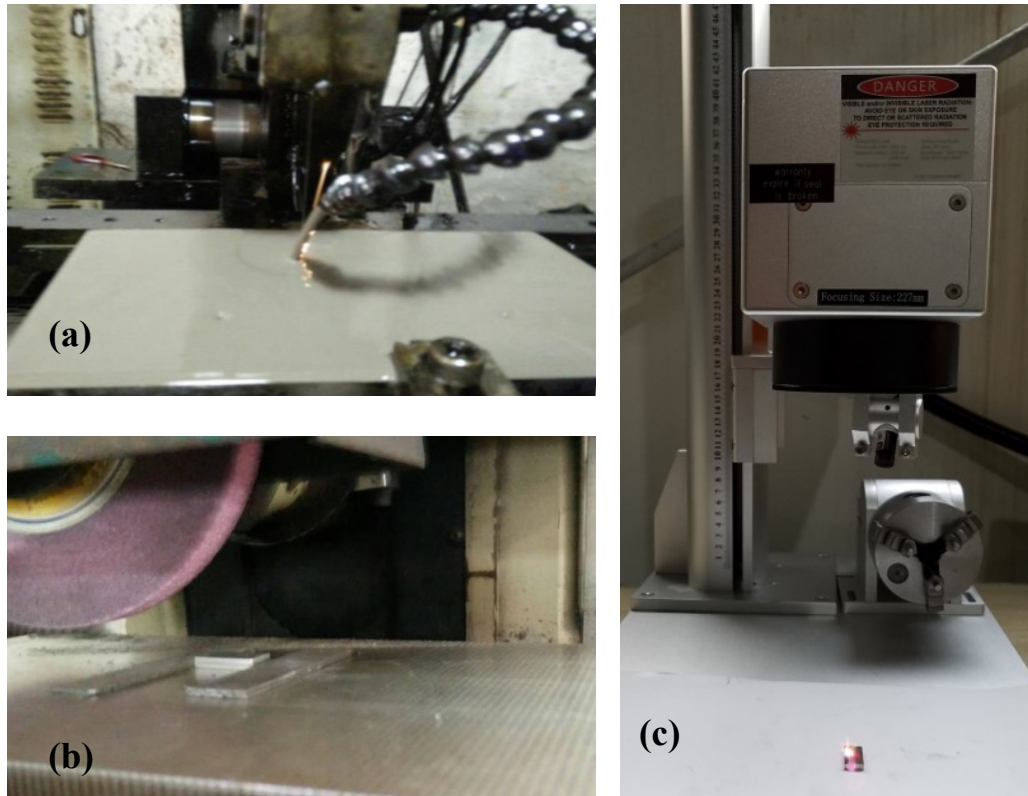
Laser Machining Steps: (a) Bulk Material Cutting and Trimming, (b) Grinding to Get Smooth Working Surfaces, and (c) Laser Machining to Produce Microstructures
